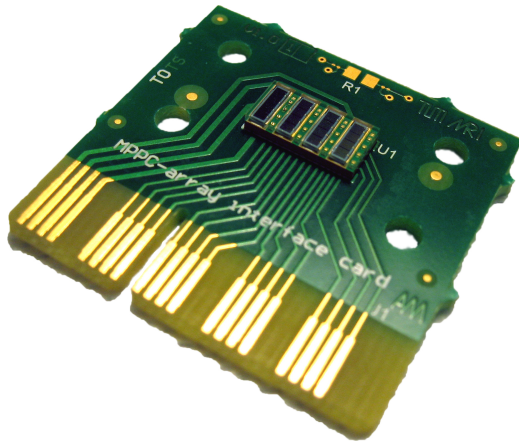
The SiPM array mounted on a custom made PCB board.
